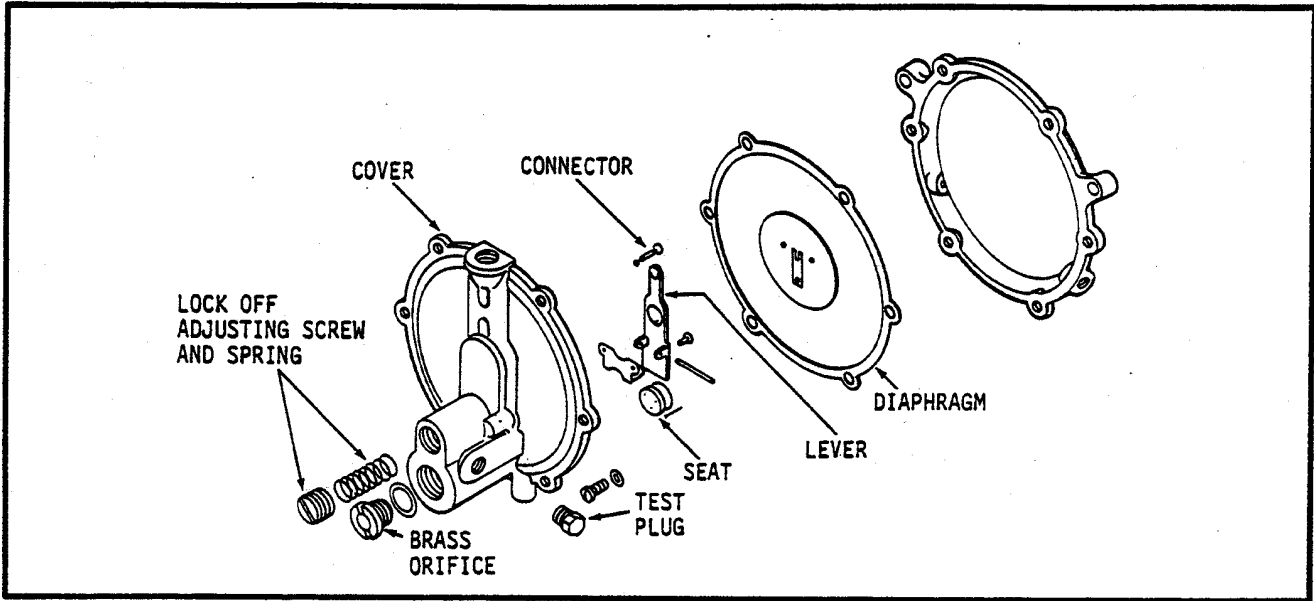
MODEL KN SECONDARY GAS REGULATOR - EXPLODED VIEW
